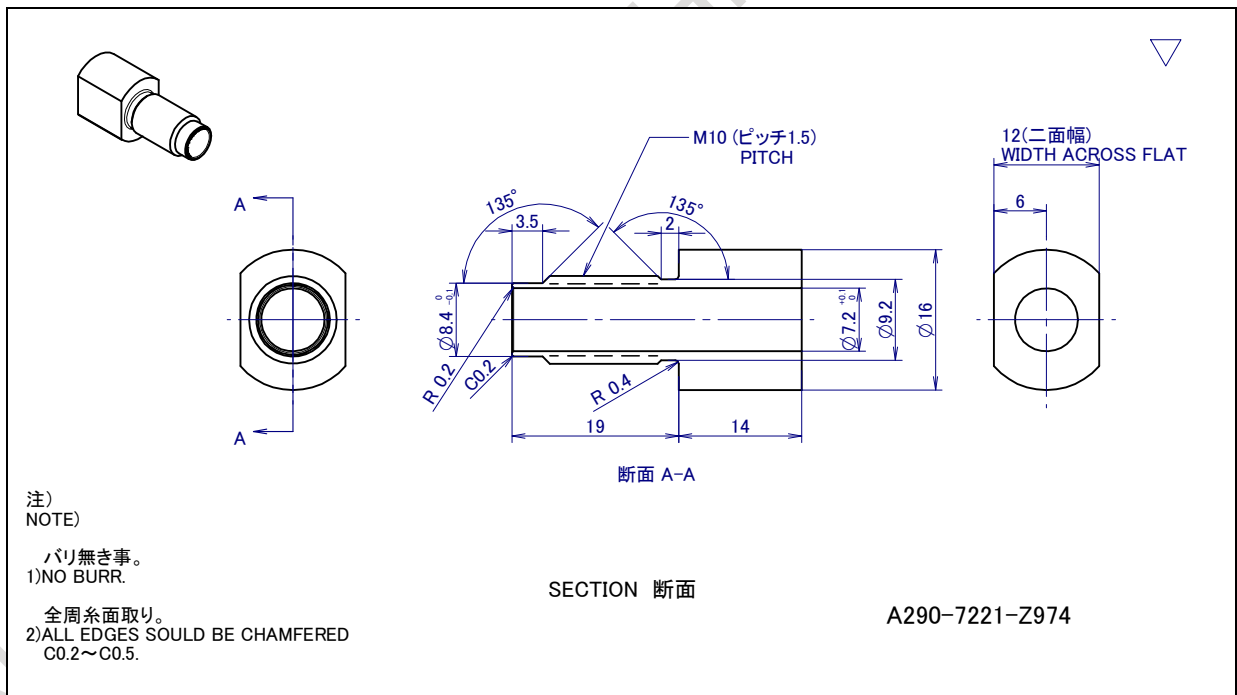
(h) Mounting fixture for J3-axis motor
